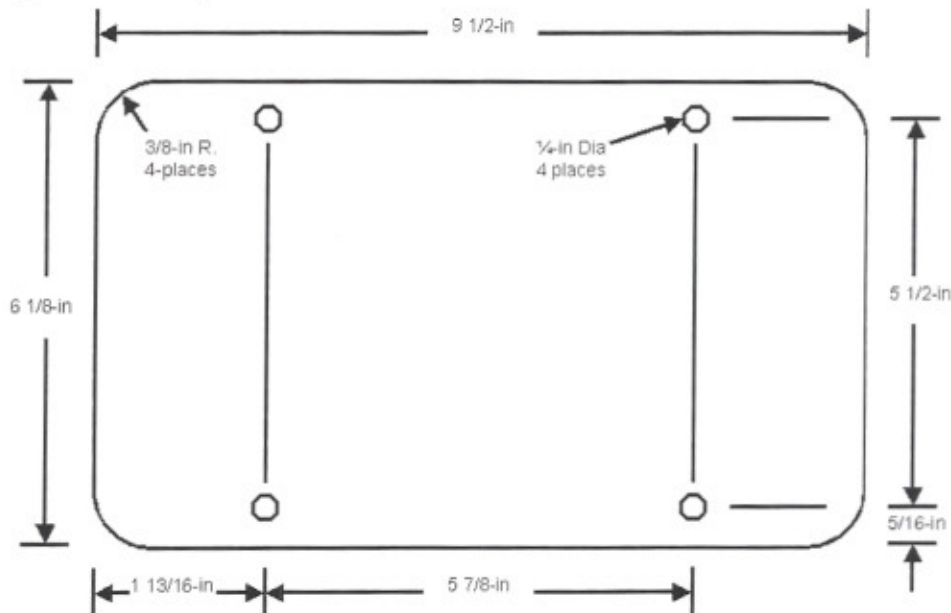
Collins 516F-2 power supply front-grill backing-panel dimensions.
